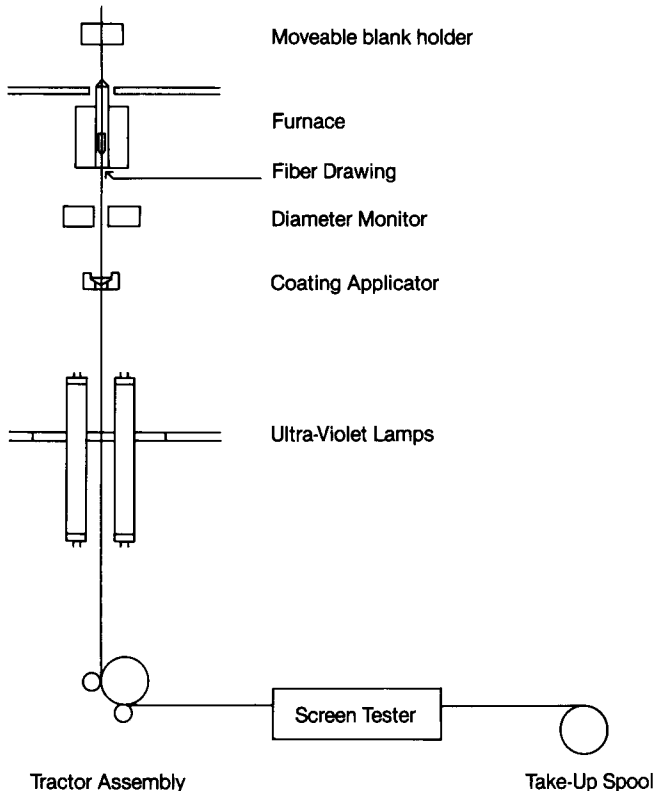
Fiber drawing process (Courtesy of Corning Incorporated).
